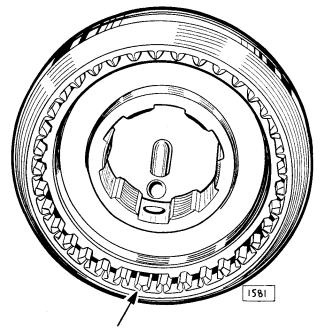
The relieved teeth in the operating sleeve must be in line with the interlock plunger holes in the synchro sleeve.
